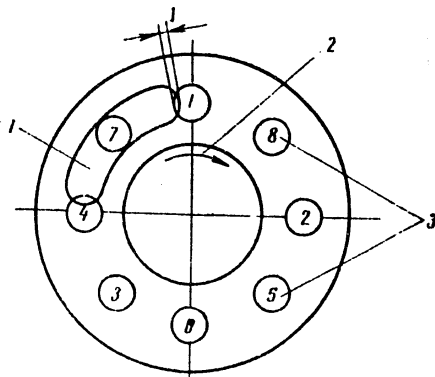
SETTING THE AIR DISTRIBUTOR SLIDE VALVE ACCORDING TO THE FIRST CYLINDER DURING "AHEAD" ROTATION
